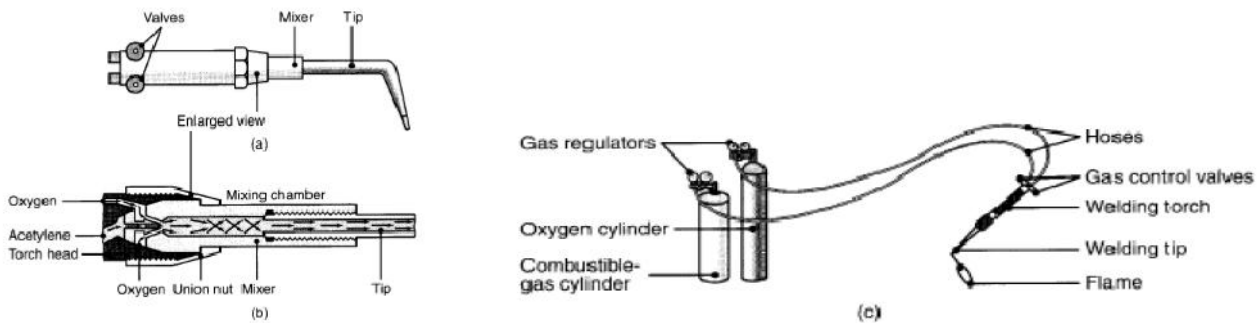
FIGURE (a) General view of, and (b) cross section of, a torch used in oxyacetylene welding. The acetylene valve is opened first. The gas is lit with a spark lighter or a pilot light. Then the oxygen valve is opened and the flame adjusted. (c) Basic equipment used in oxyfuel-gas welding. To ensure correct connections, all threads on acetylene fittings are left handed, whereas those for oxygen are right handed. Oxygen regulators usually are painted green and acetylene regulators red.
